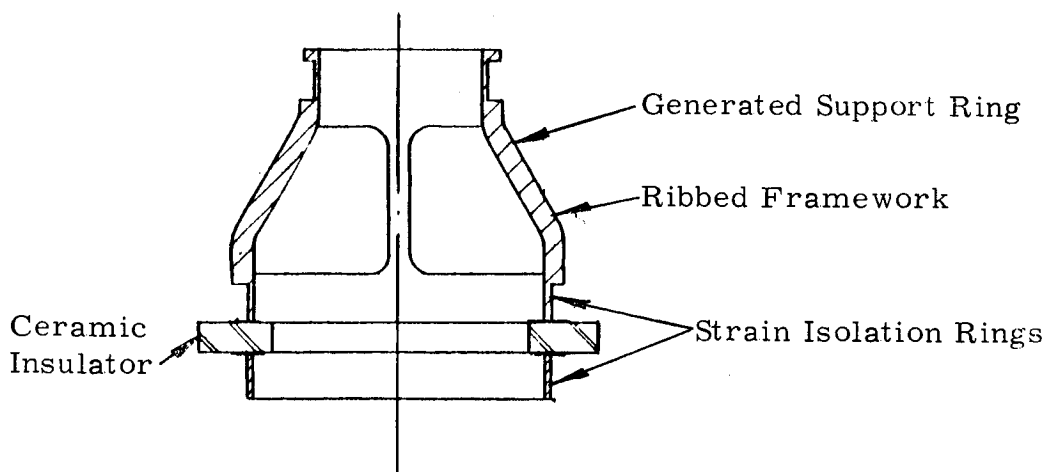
GENERATOR SUPPORT RING SUB-ASSEMBLY
